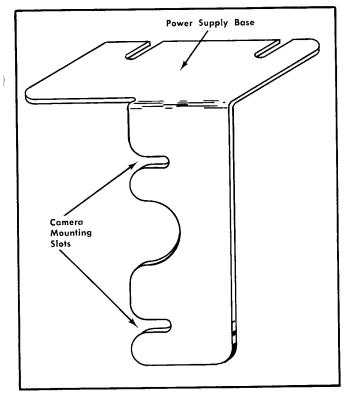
Power Supply Mounting Bracket (407-0477-00) terminology.
